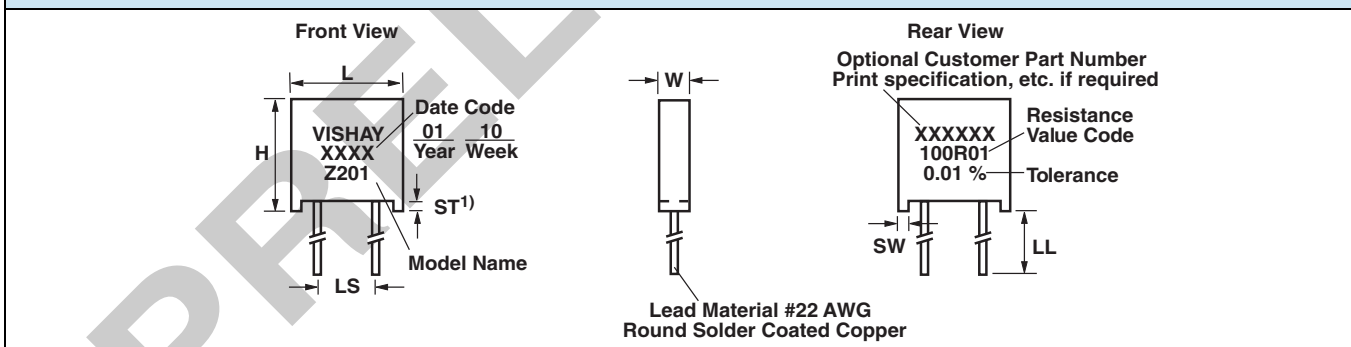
STANDARD IMPRINTING AND DIMENSIONS
